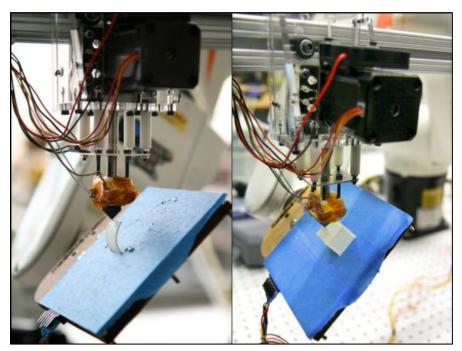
Multi-axis 3D printing of a curved part is seen on the left (a) and a hollow cube with a captive internal part is being printed on the right (b).
